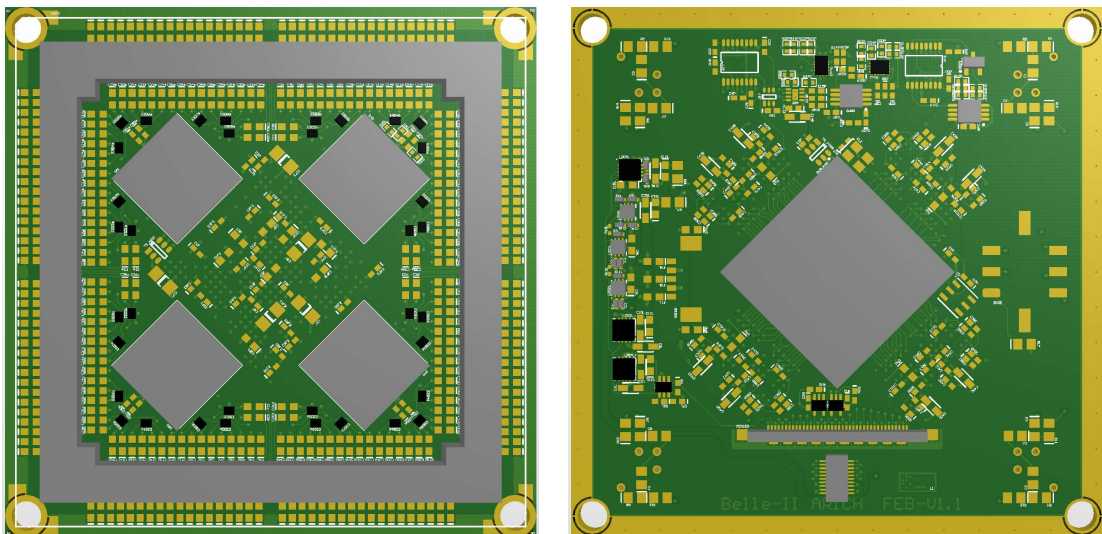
The ASIC (left) and FPGA (right) side of a front-end board [36].
